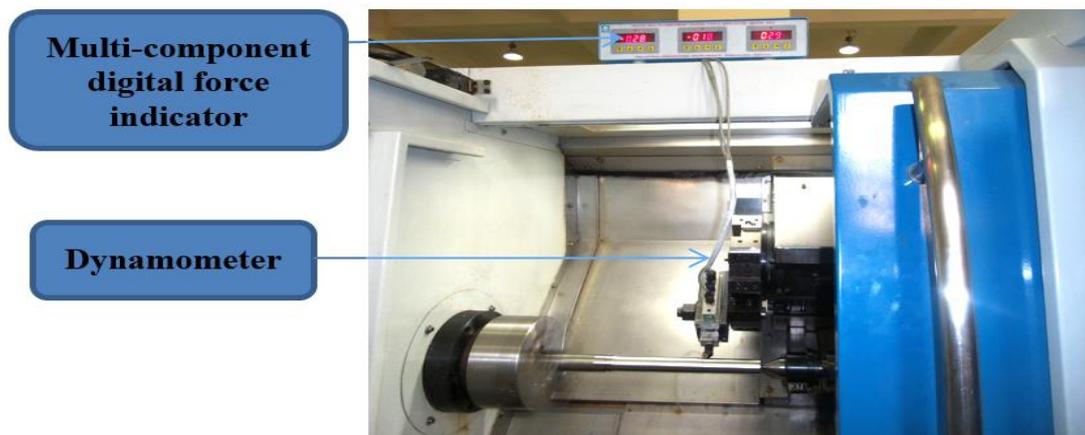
Machine setup showing the use of the dynamometer and multi-component digital force indicator during turning AISI 316 stainless steel
